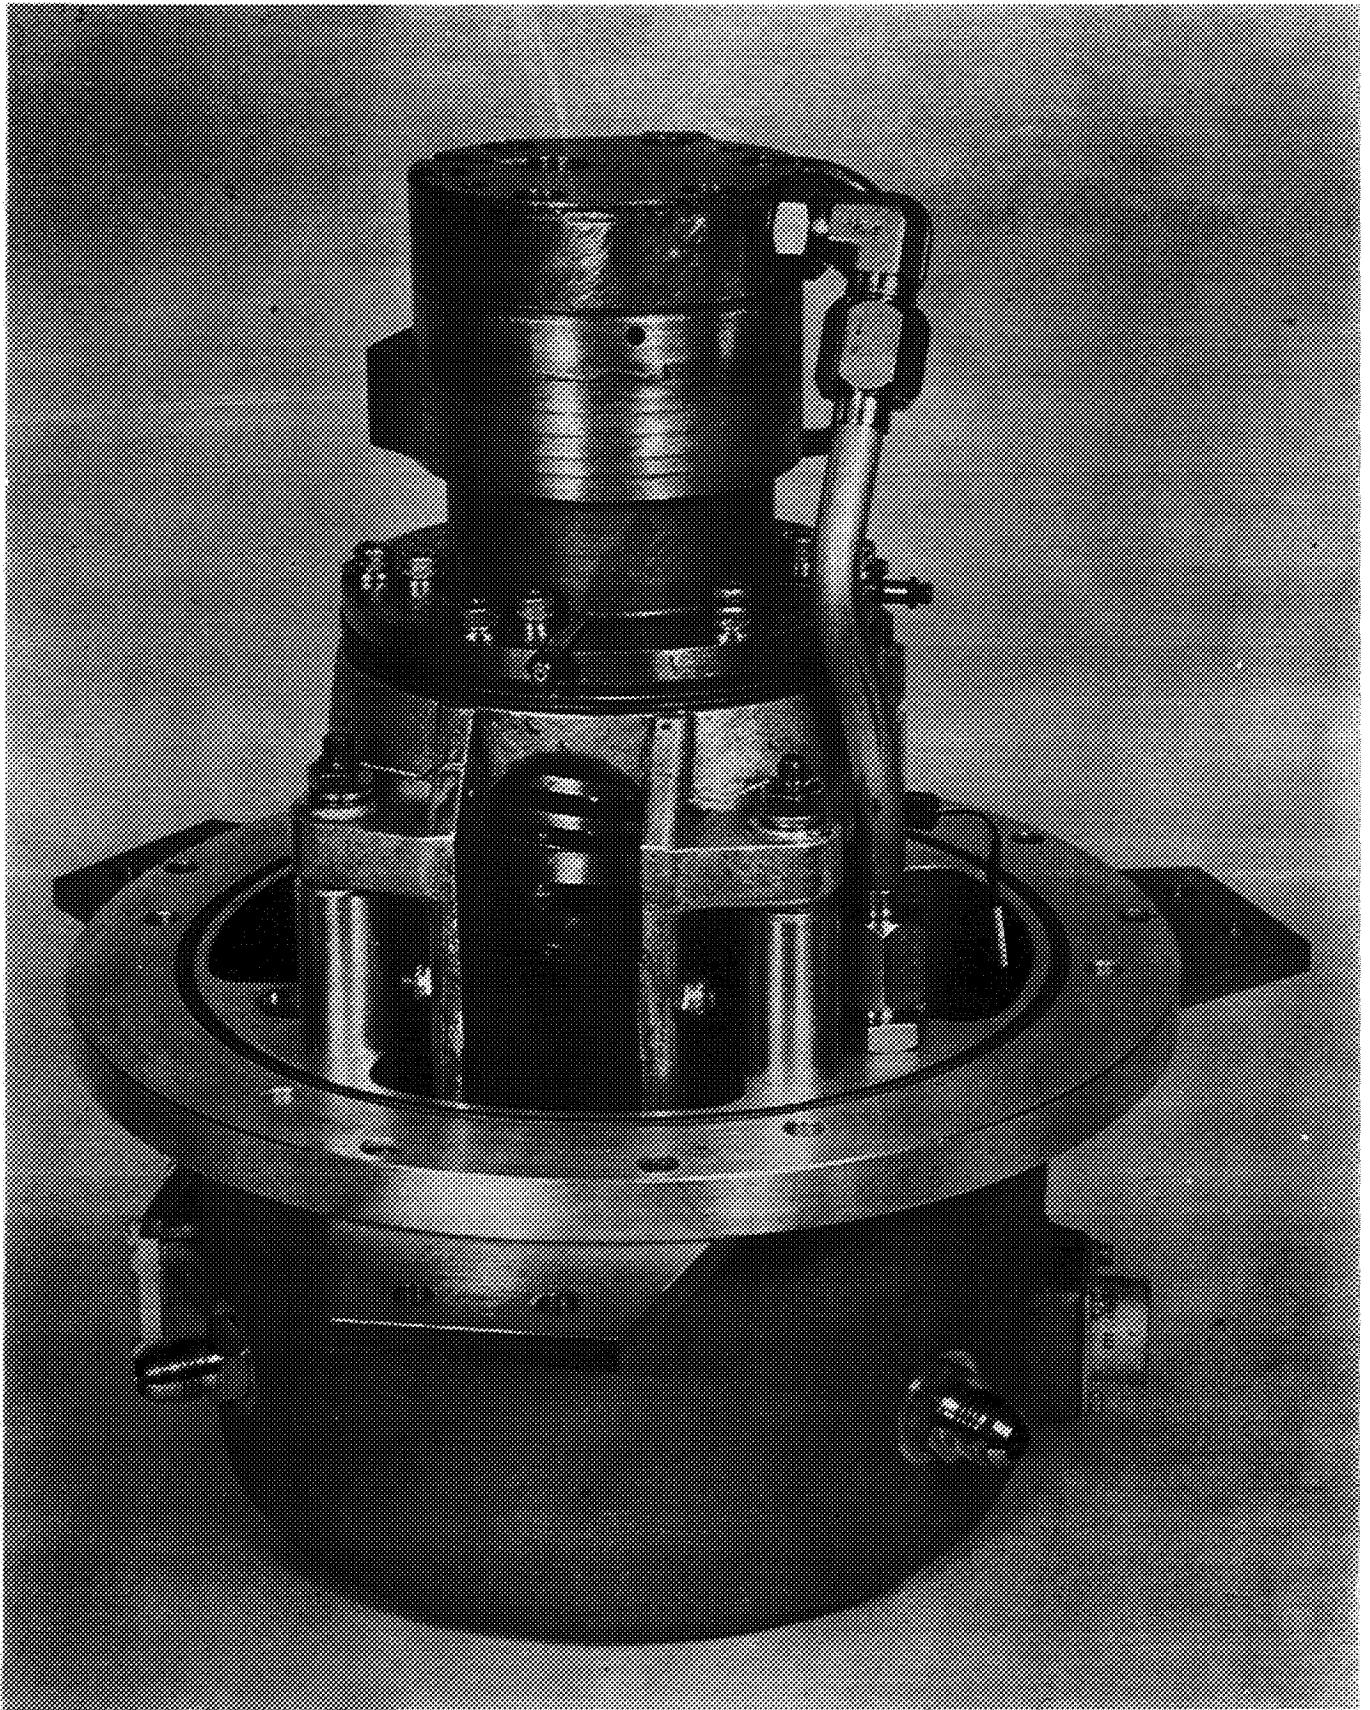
View Showing Assembled Arrangement of the Improved Resonant Spring in the Improved Compressor of Contract NAS 8-20720.
